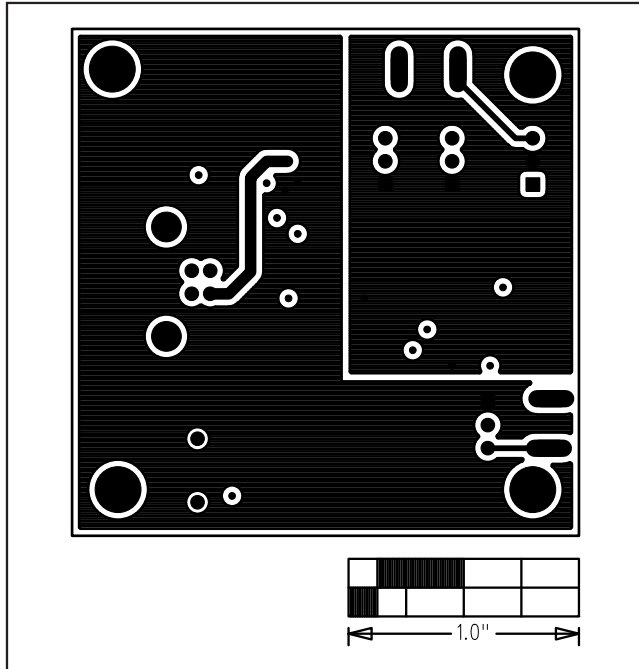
MAX14508E EV Kit PCB Layout—Inner Layer 3
